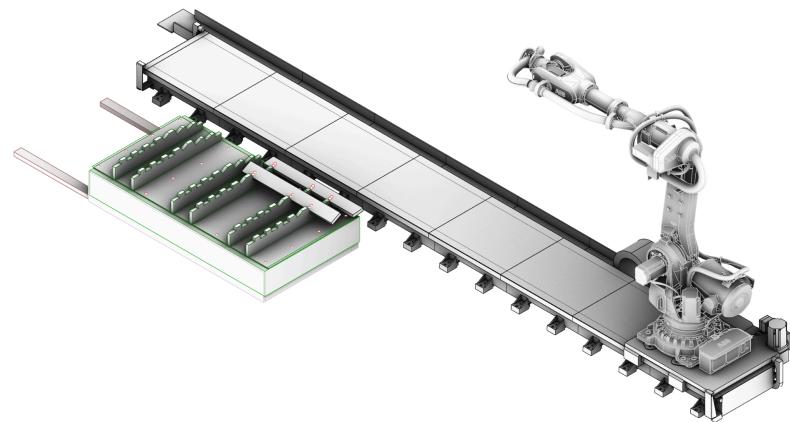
Stock material mounted at a slight angle for robotic milling. Screws are noted as red points.
